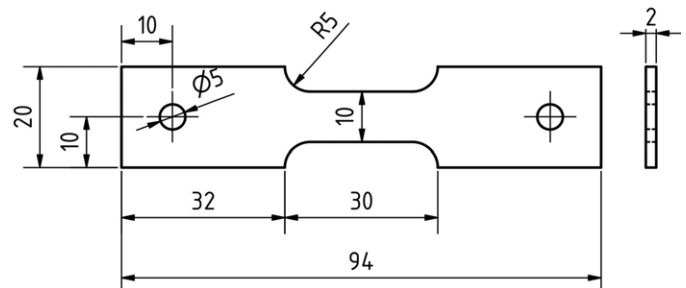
Dimensions of the samples for testing on a Gleeble 3500 device (unit: mm)
